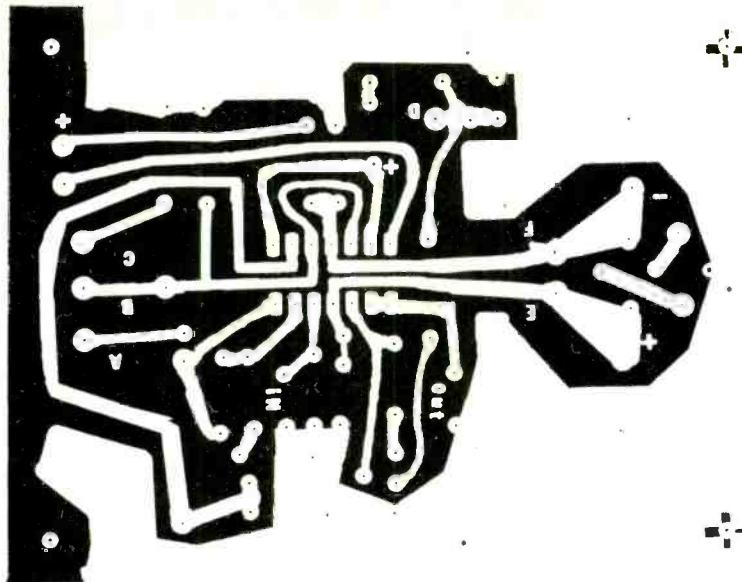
Use the foil pattern at top to make a printed circuit board and install components as shown.
